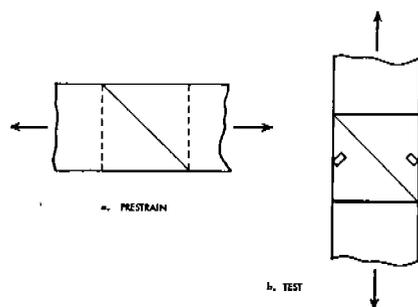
Welded plates with prestrain transverse to the direction of testing
